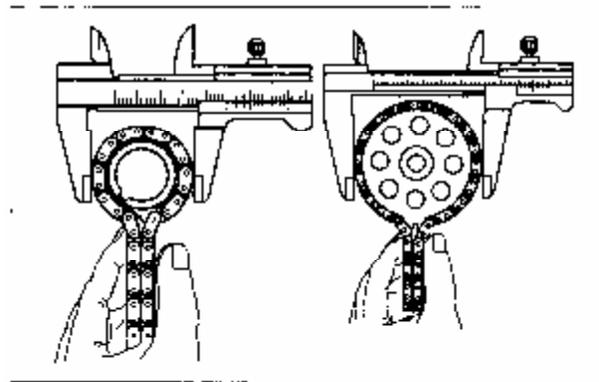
Measure Diameters of Crankshaft Timing Sprocket and Camshaft Timing Sprocket (with Chain)
